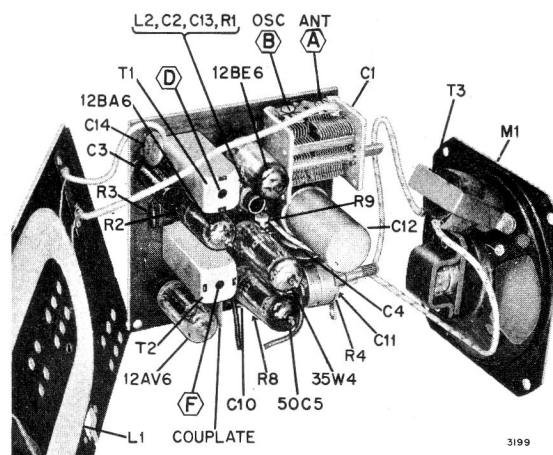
Top View of Chassis. Location of components and alignment points shown.
